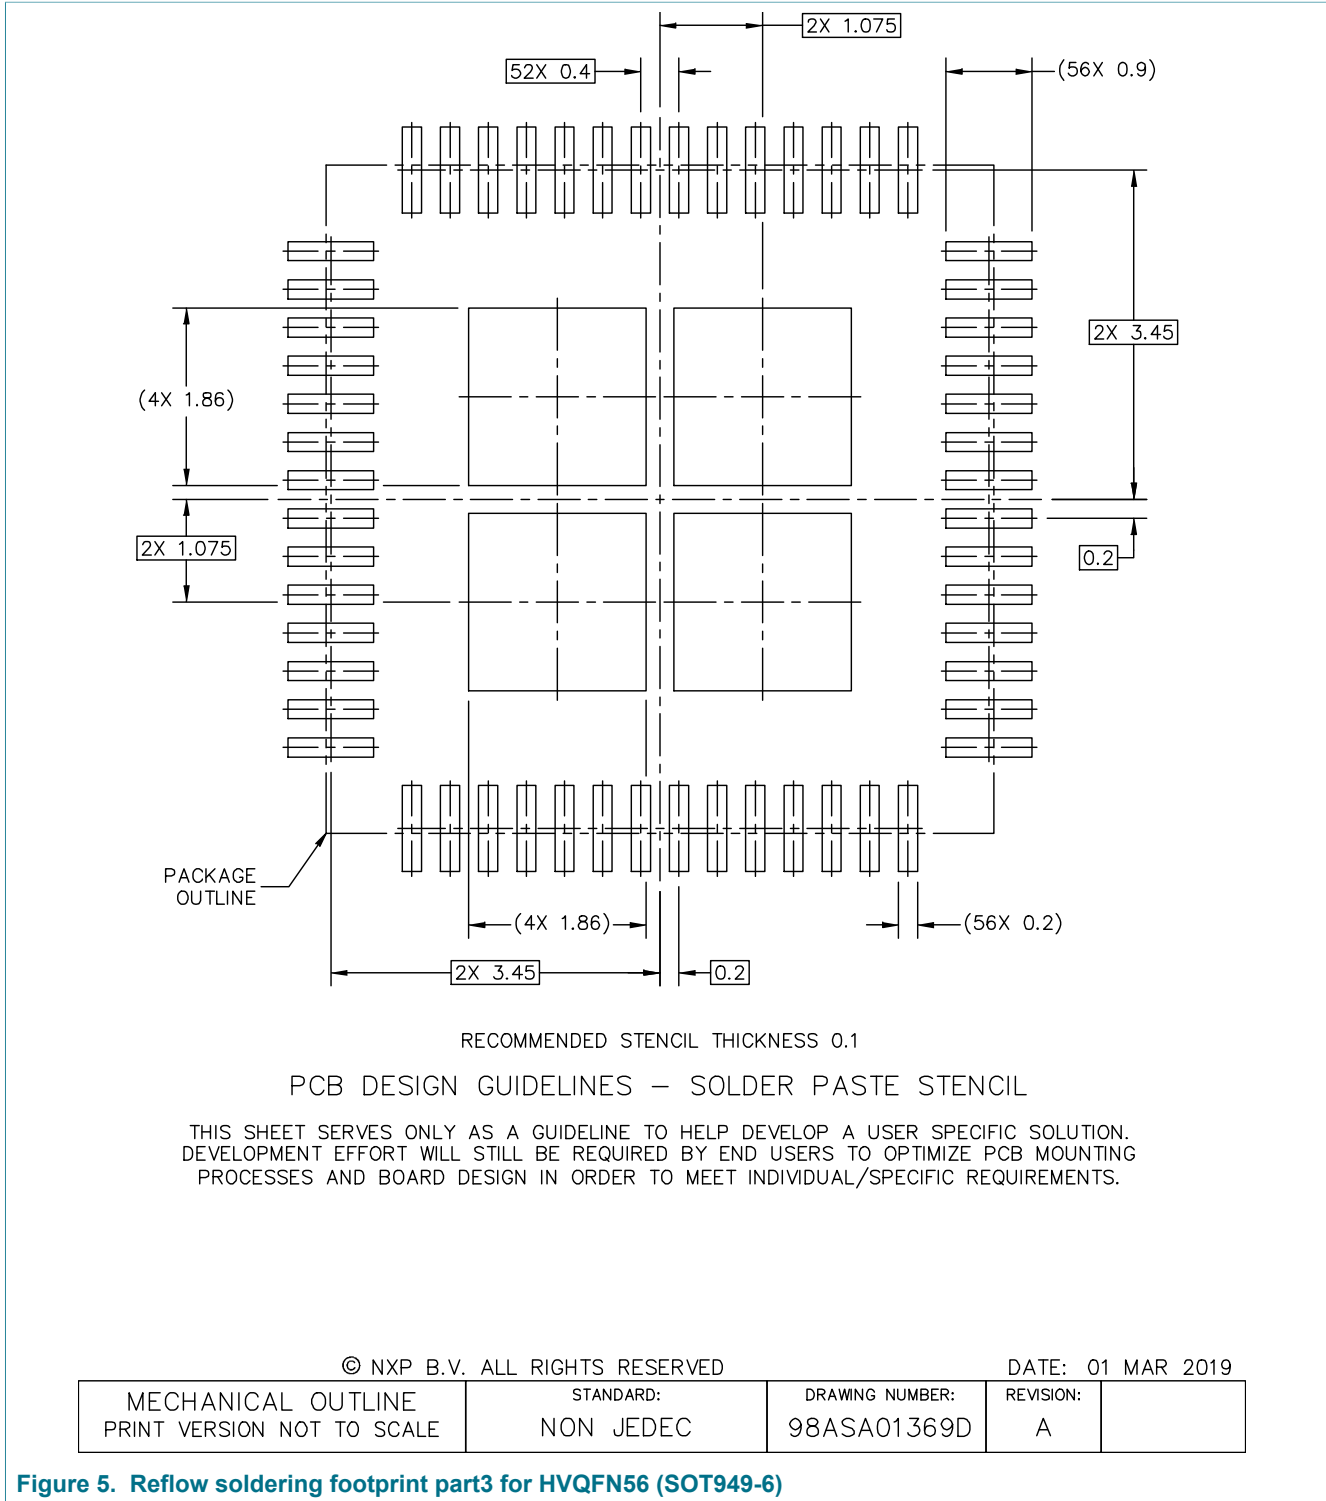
Reflow soldering footprint part3 for HVQFN56 (SOT949-6)
